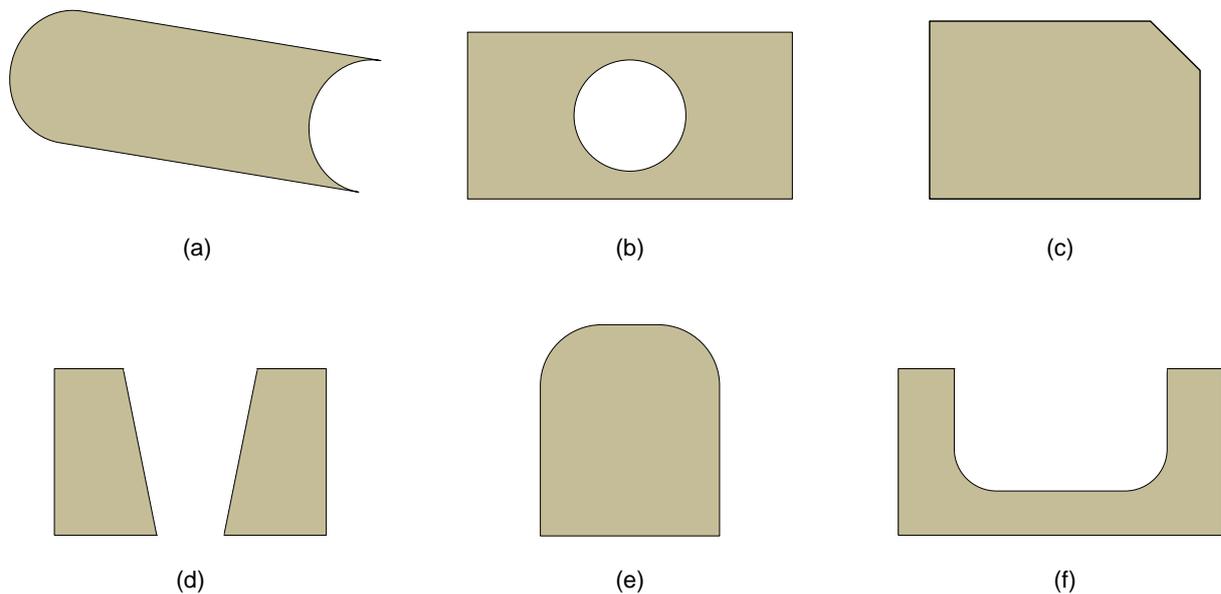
Face shape and feature examples. (a) fillet, (b) hole, (c) chamfer, (d) tapered holes, (e) rib, (f) groove
